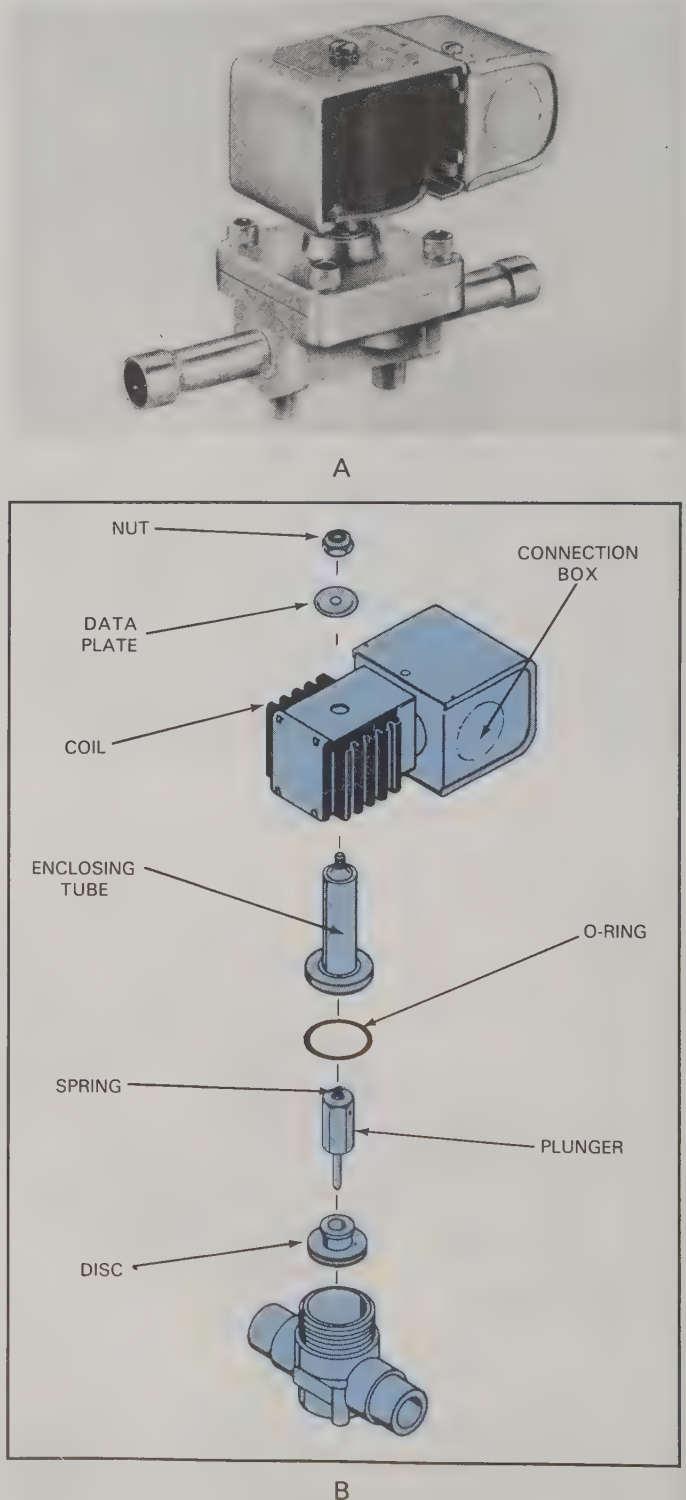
Solenoid valve. A—A typical solenoid valve has the coil mounted on top of the valve body. (Parker Hannifin) B—Exploded view of a solenoid valve. (Sporlan Valve Co.)
